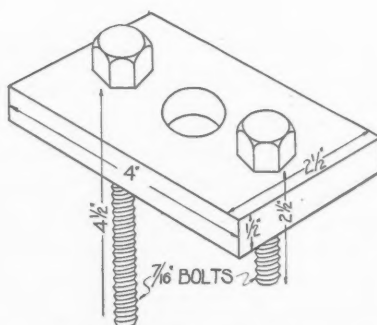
Sketch Showing Construction and Dimensions of Gear Puller
